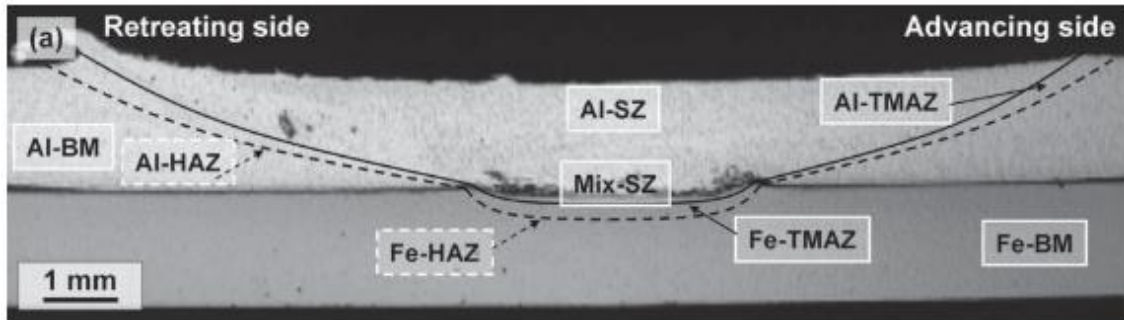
Schematic view of the different welded zones of a joint [10].
